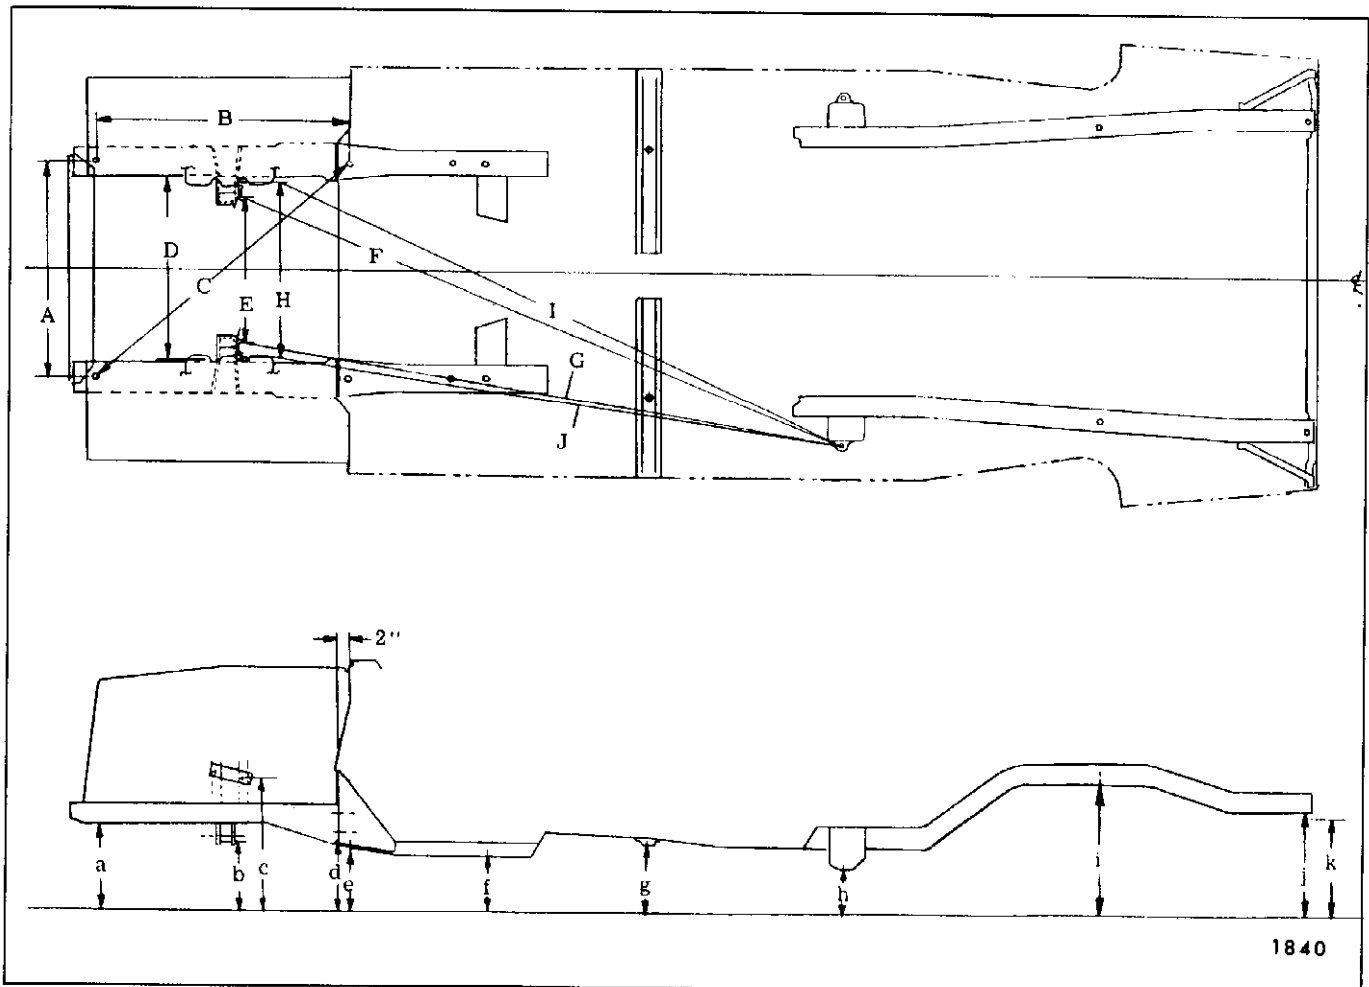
Horizontal and Vertical Dimensions (Front Skirt Assembly)
